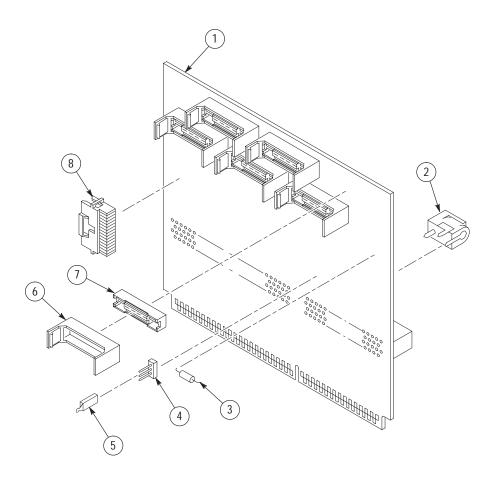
TMS S1A SC242 probe adapter exploded view
